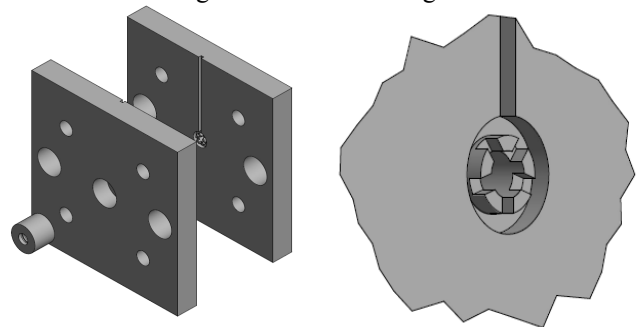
CAD drawing of coaxial input coupler; (L) the complete coupler with Bragg reflector and (R) close up of waveguide channel.
